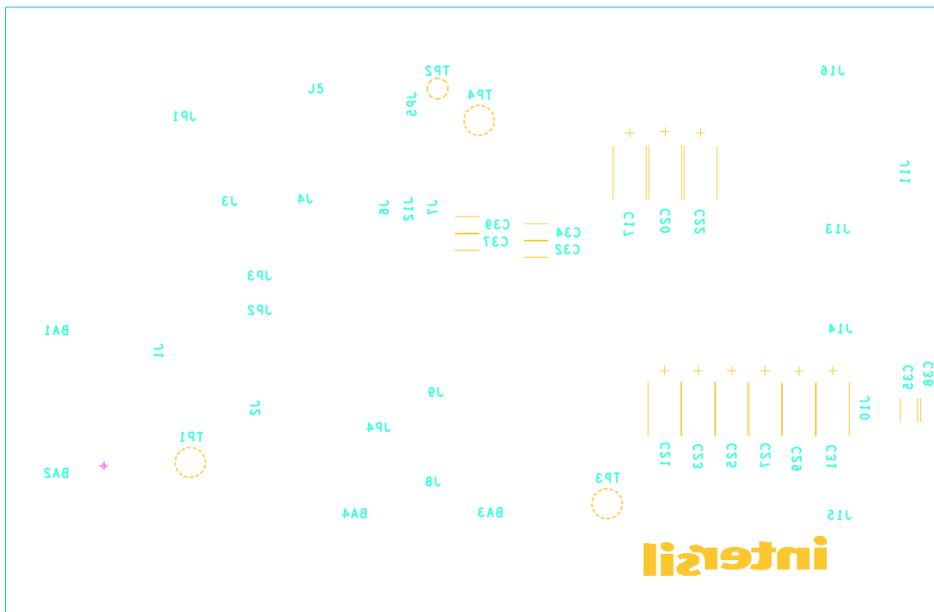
ISL73041SEHEV1Z Bottom Assembly Layer
